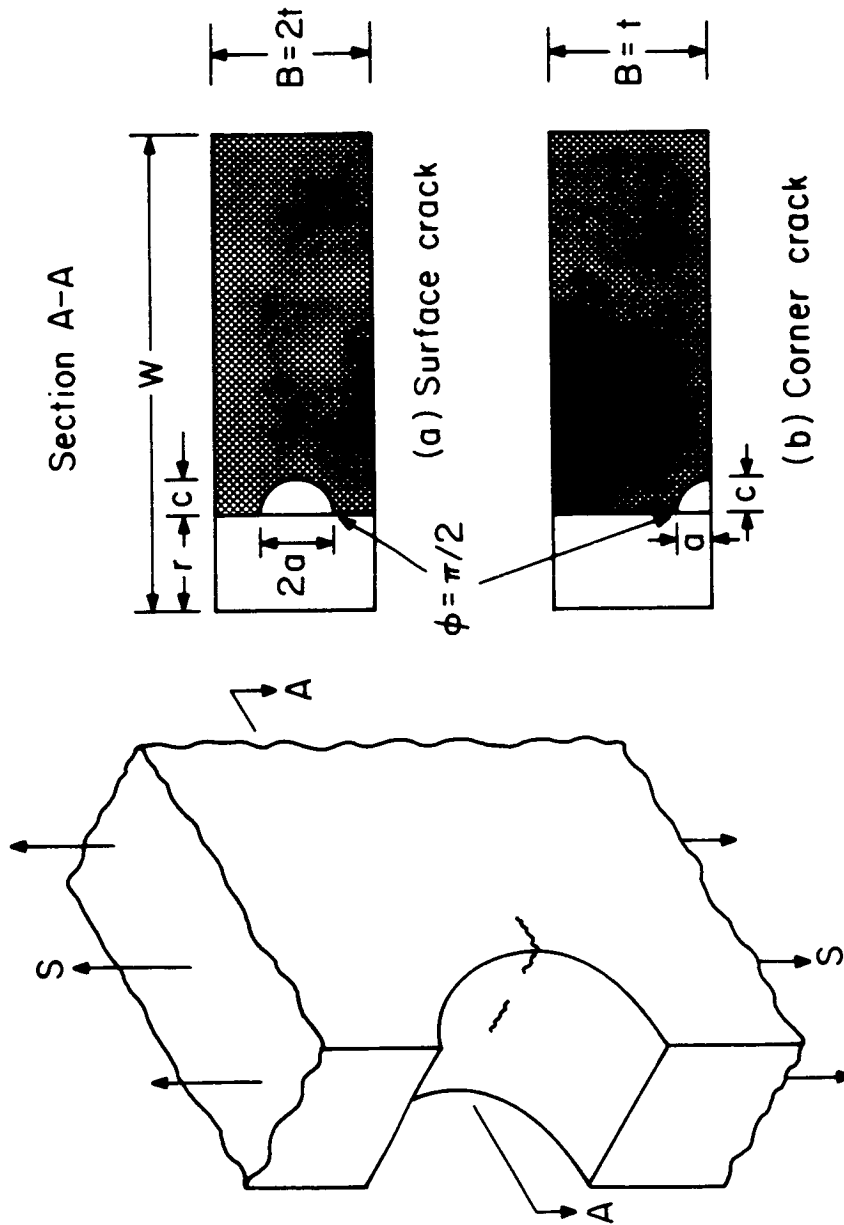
Definition of dimensions for surface crack and corner crack at a notch in a finite plate
